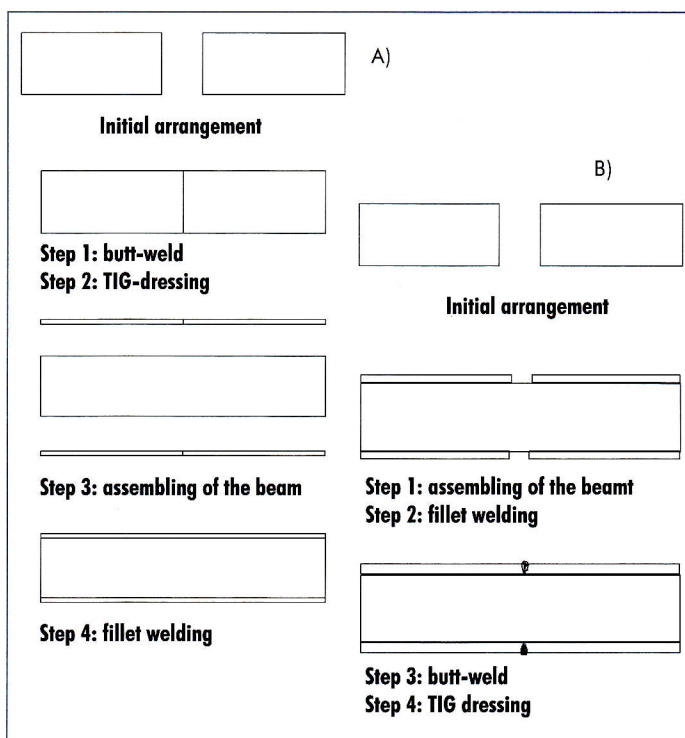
Assembling and welding sequences of series A, left, and B, right.
